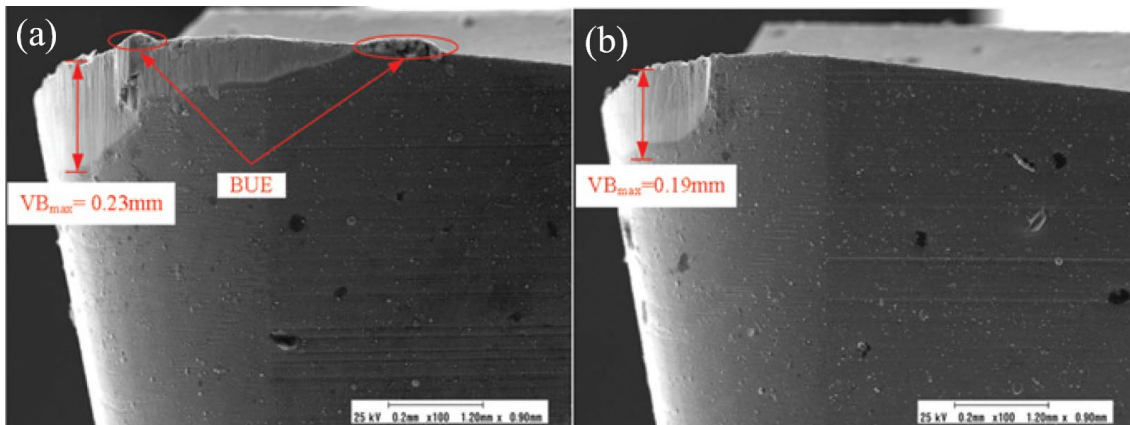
SEM micrographs of cutting tools used in (a) Conventional machining; (b) Elliptical vibration assisted machining (Lu *et al.*, 2015).
